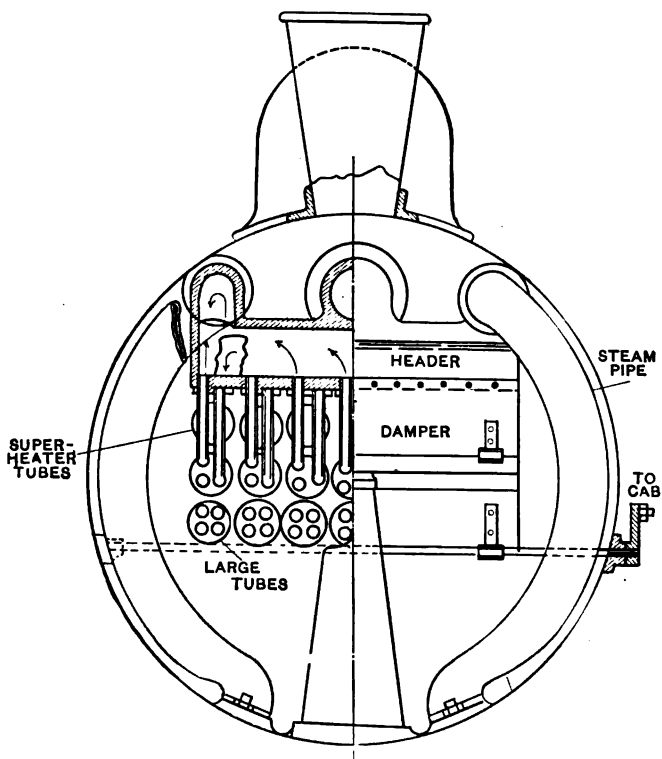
Elevation and Cross-section of Schmidt Superheater.
